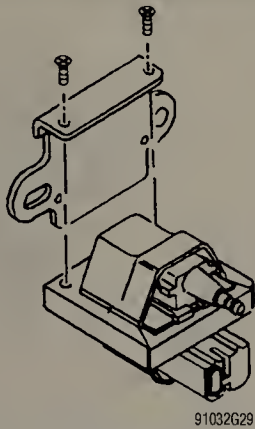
The ignition coil is mounted to the bracket with 2 retaining screws
